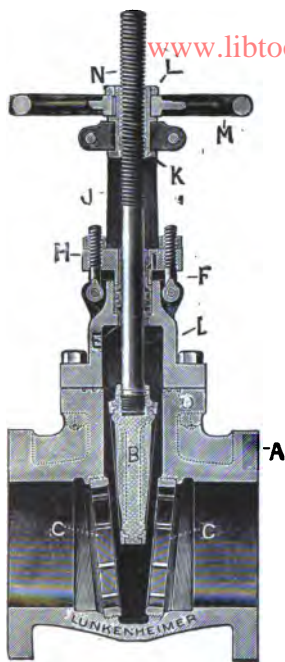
Extra Heavy Gate Valve, Outside Screw and Yoke.
